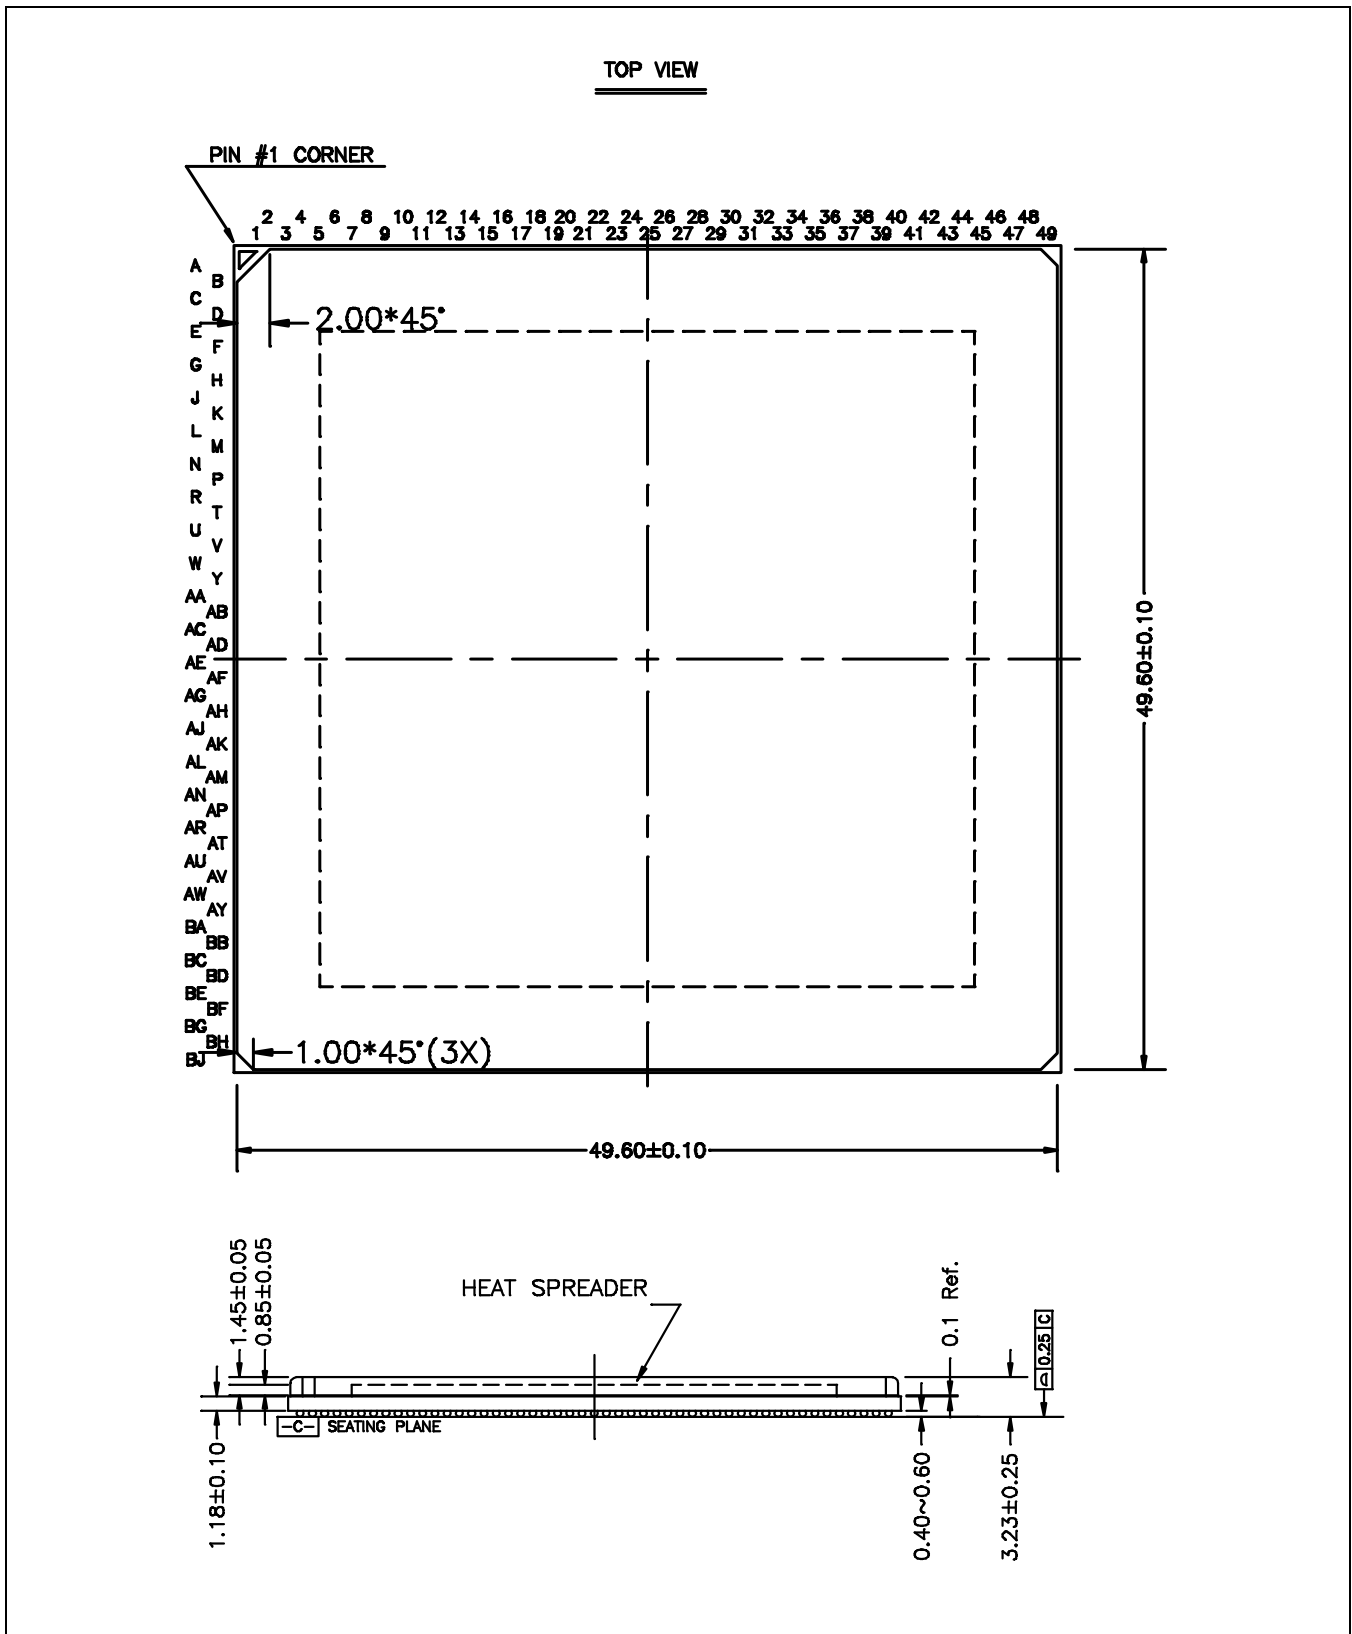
M21170 Packaging Drawing (Top and Side Views)
